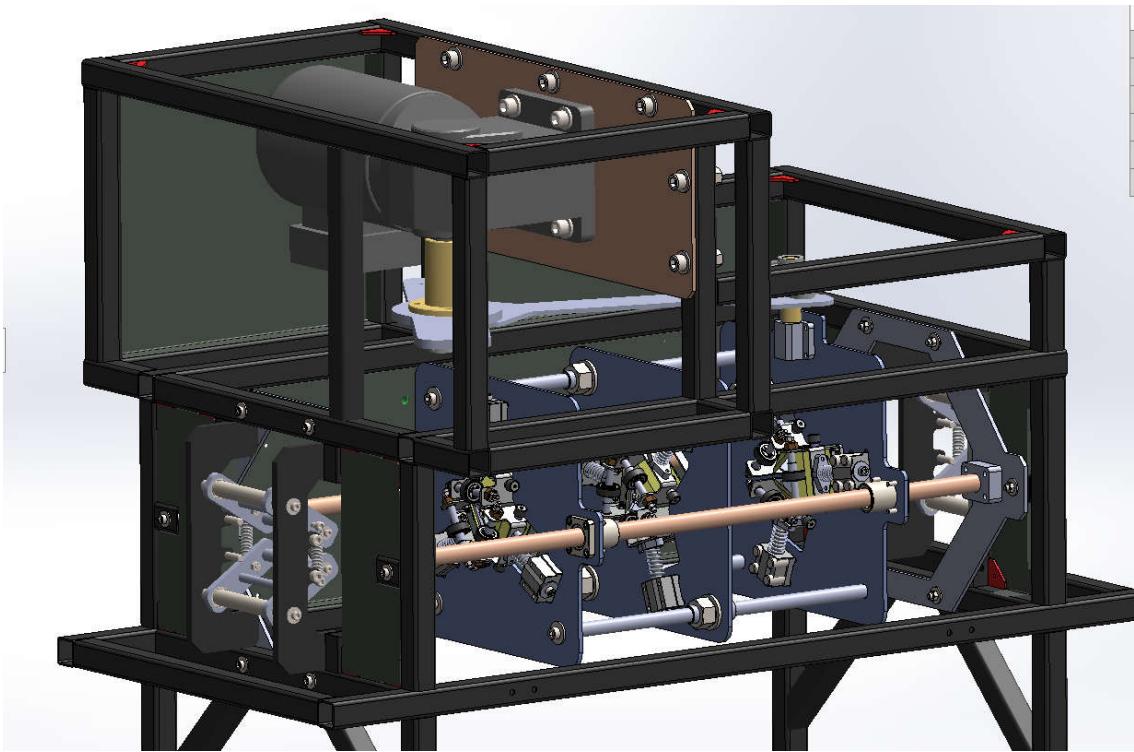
Machine design in 3D (covers partially omitted to show the peeler frame)
